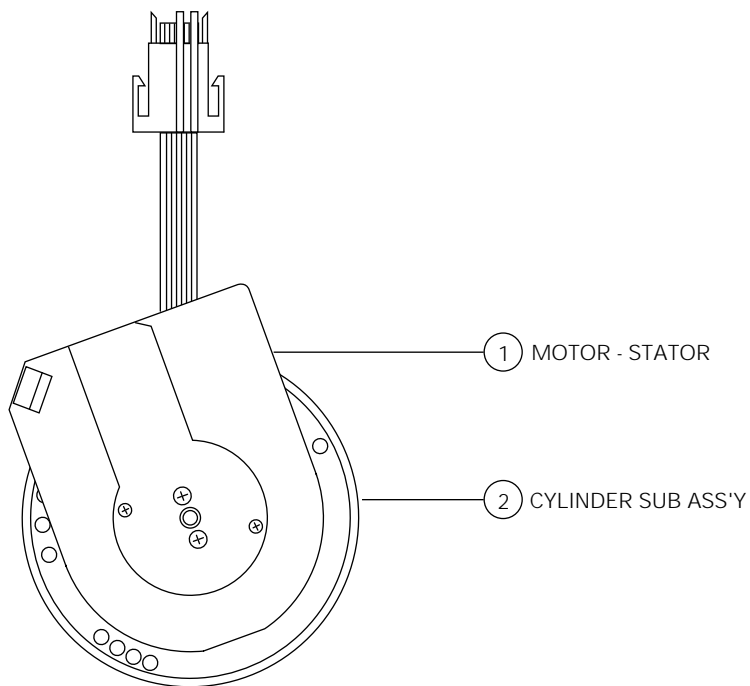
Assembly of Motor Stator and Cylinder Sub Ass'y
